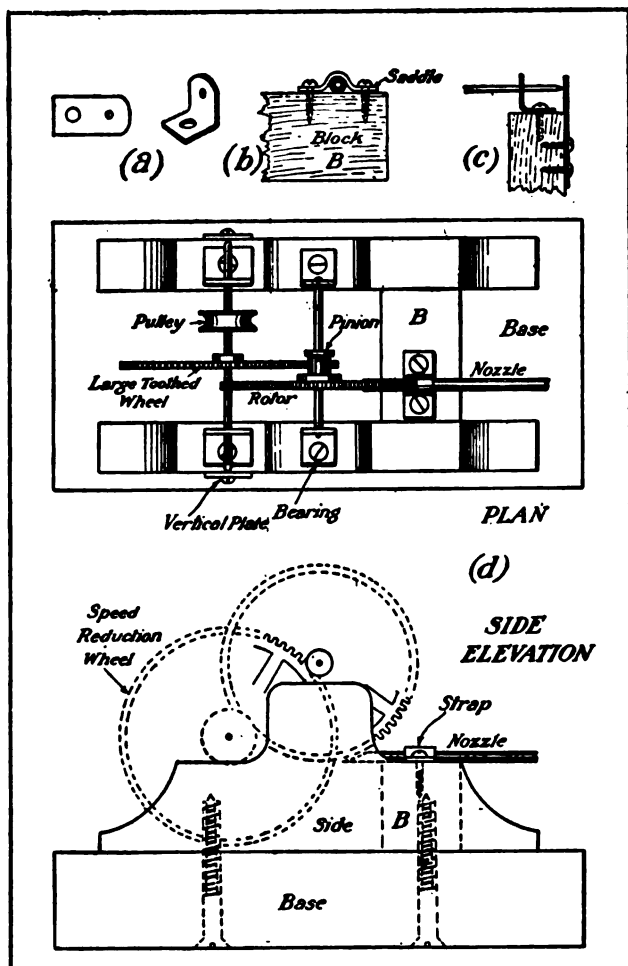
A clock-wheel turbine. (a) Supports for wheels. (b) Nozzle (in section) and saddle. (c) Bearing for reduction wheel. (d) Turbine in plan and side elevation (some details omitted). Half full size.
